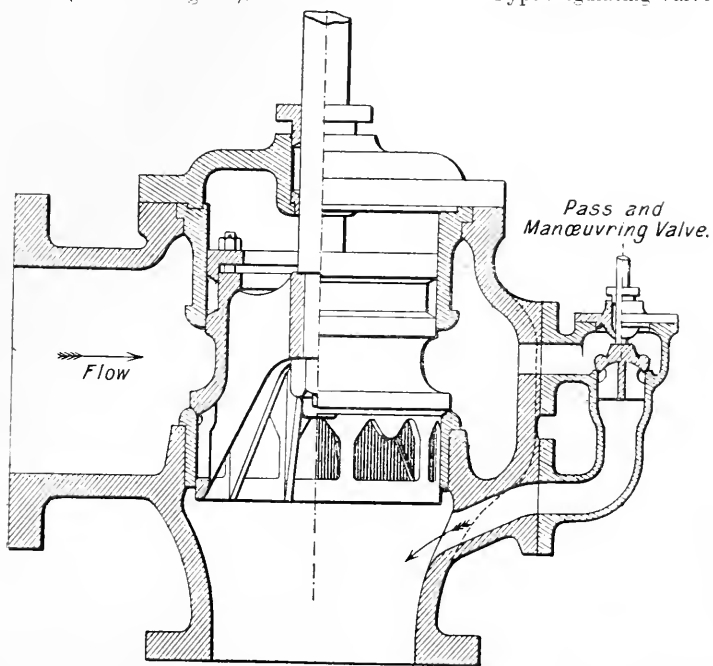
Balanced Stop and Regulating Valve (for large engines)
